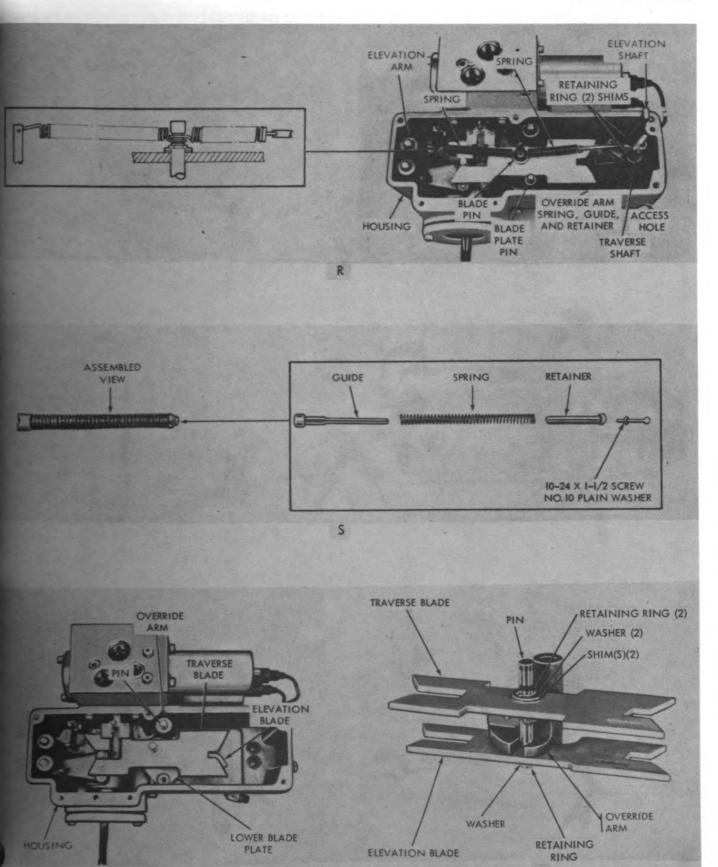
Gunner's control disassembly or assembly (4 of 6).
